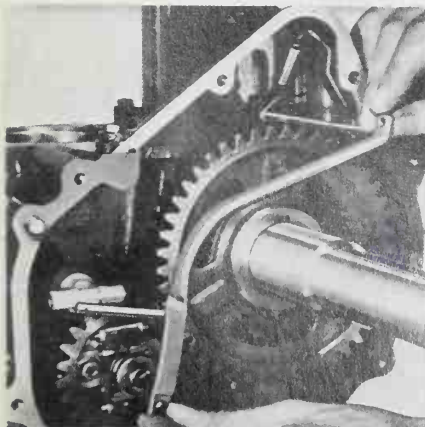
Governor lever is carried in a fulcrum bearing in the crankcase.
